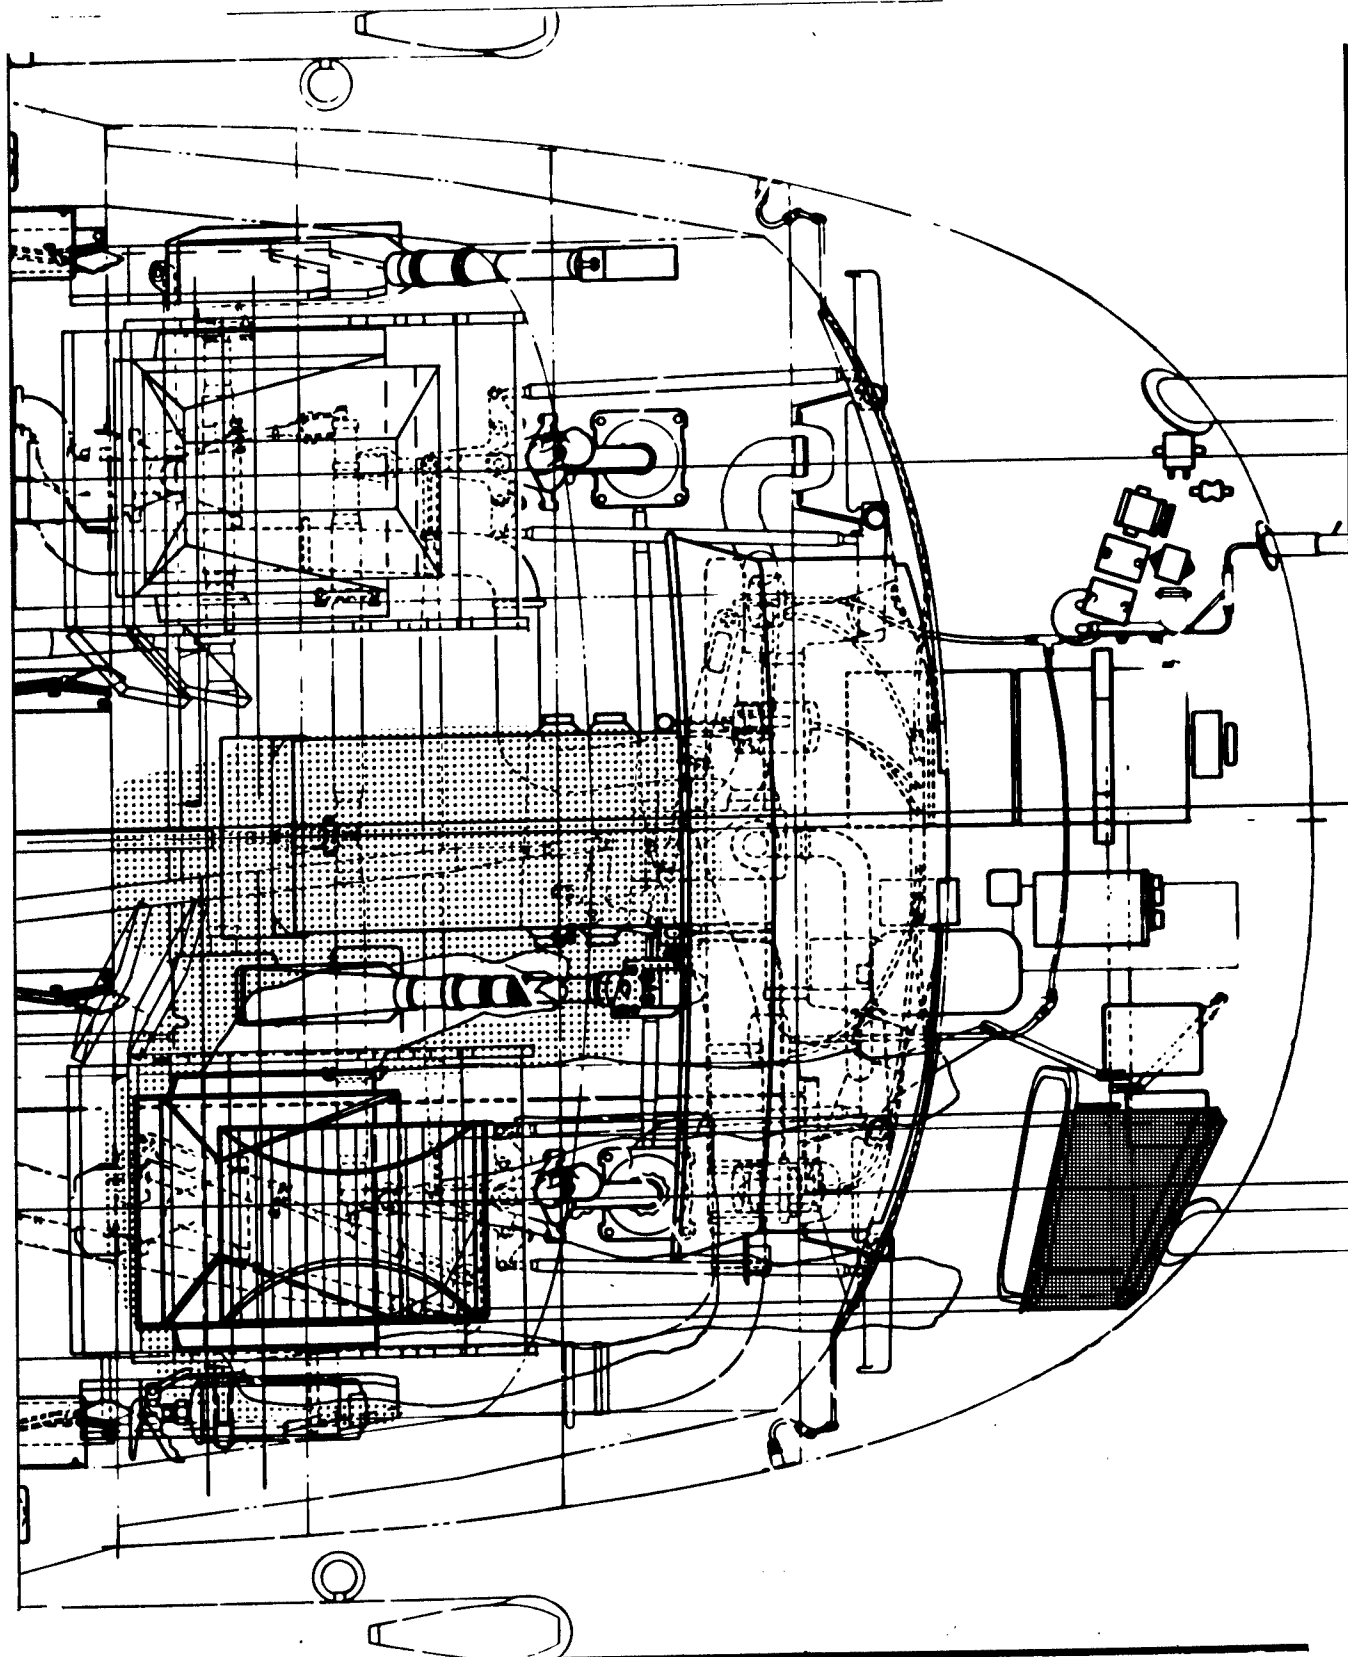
ARMOR CONFIGURATION 2 -- PLAN VIEW 0° AZIMUTH, -45° ELEVATION
